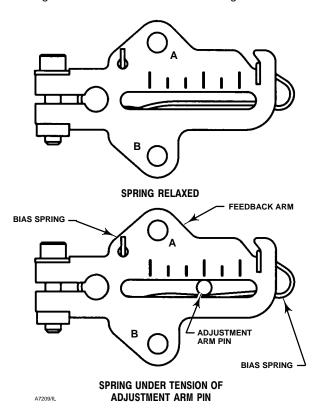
Locating Adjustment Arm Pin in Feedback Arm
